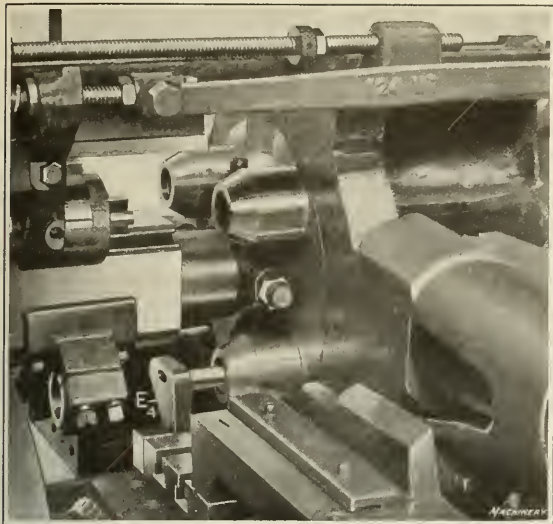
Type of Stop used when a Tool is in Fourth Position on Turret Slide
